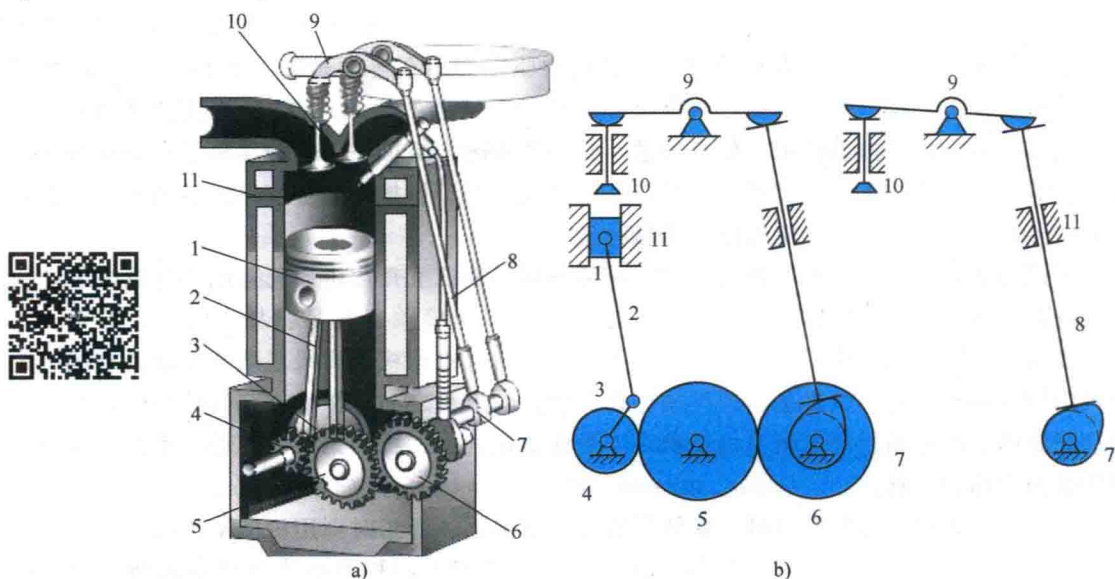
Internal combustion engine and scheme(内燃机及其机构简图)
